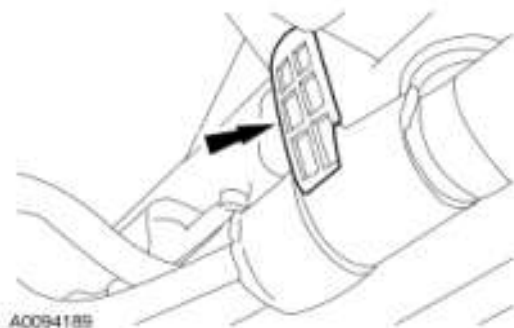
Attaching Starter Electrical Harness Support Bracket
